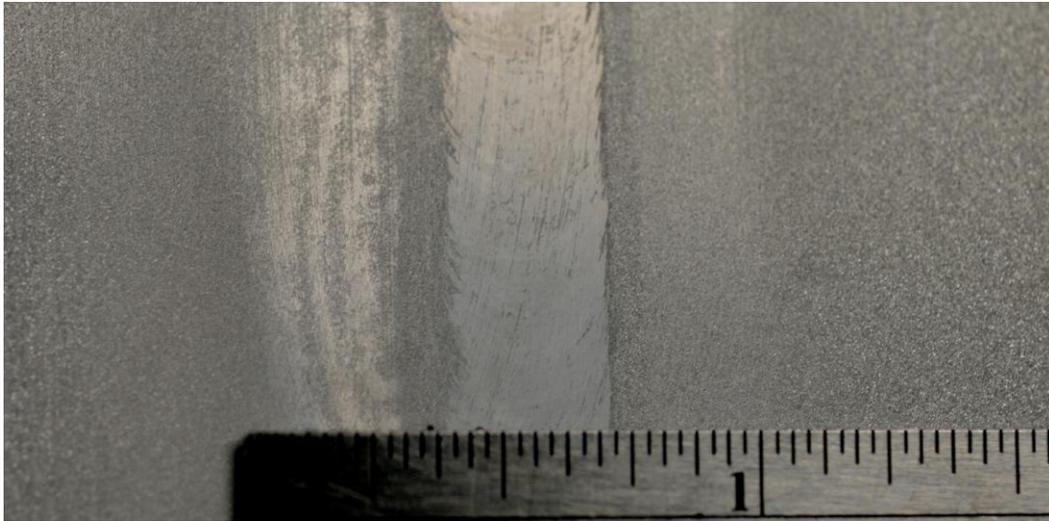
FSW: Exfoliated weld - First pass surface (upper surface of weld nugget macrograph - Figure 70)
